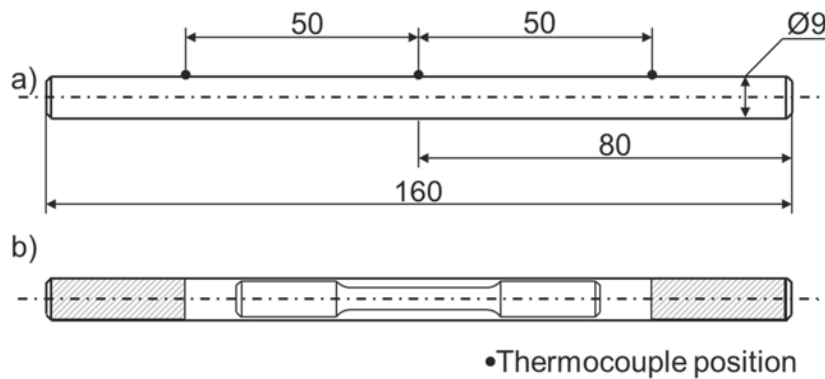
Drawings of a) sample for inductive heat treatment, black dots represent thermocouple measuring points and b) the position of final tensile test samples within the rod
